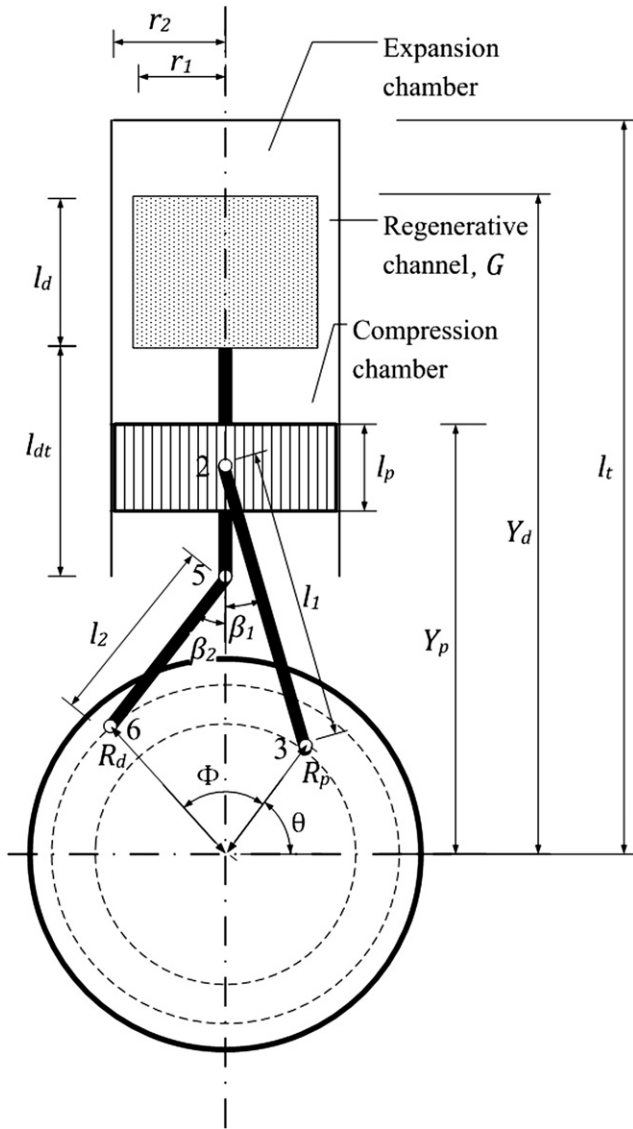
Schematic diagram of the beta-type Stirling engine with cam-drive mechanism.
